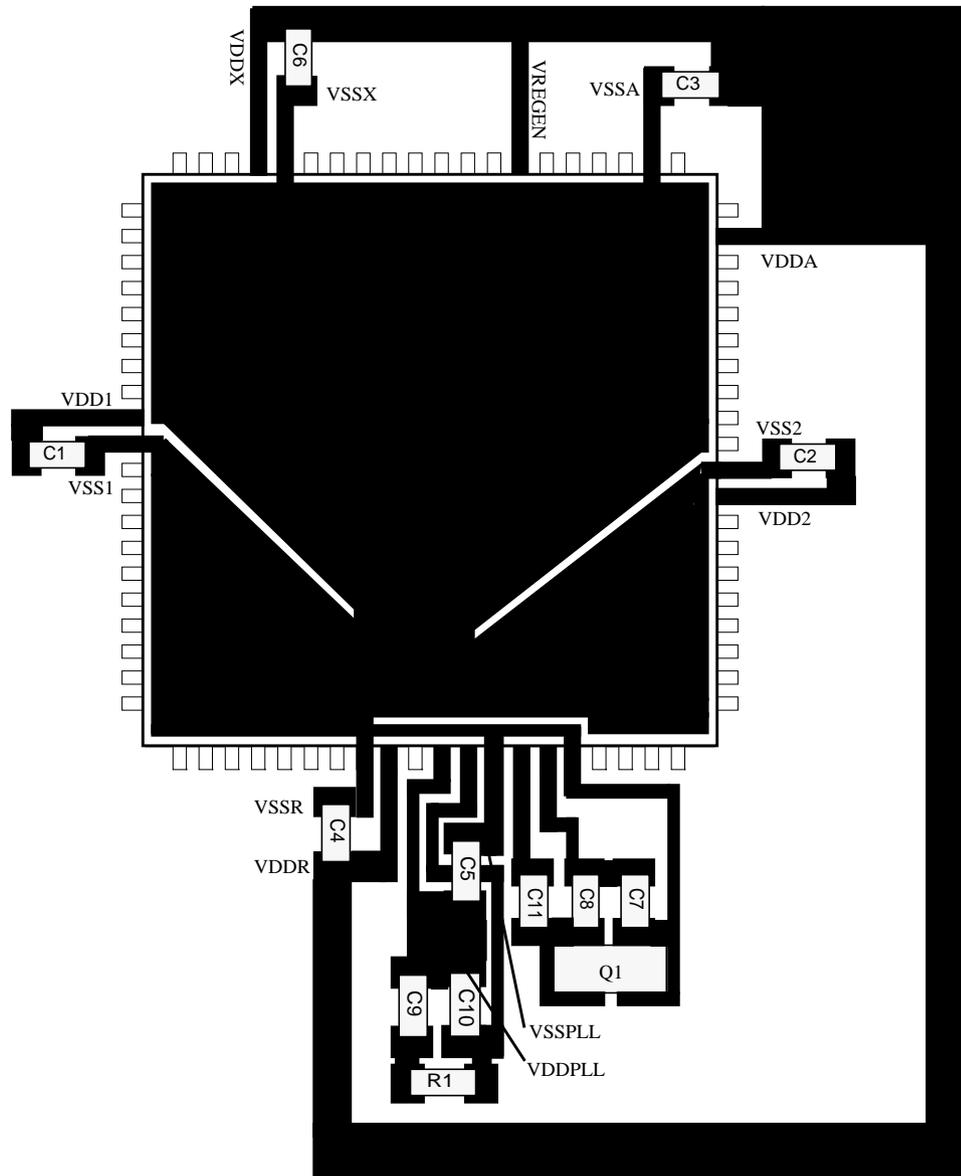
Recommended PCB Layout for 80QFP Colpitts Oscillator
